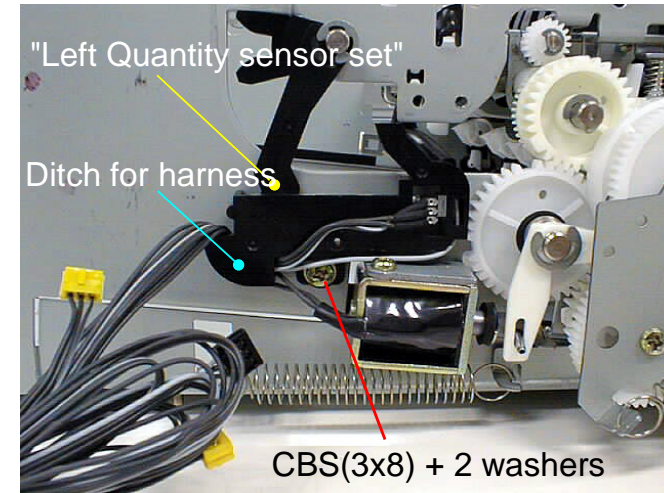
Releasing harness for Paper Pick Up (Upper surface)Sensor
